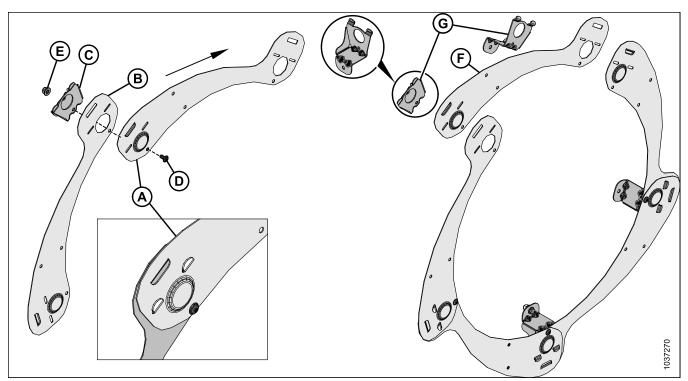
Five-Bat Reel - Initial Endshield Assembly
